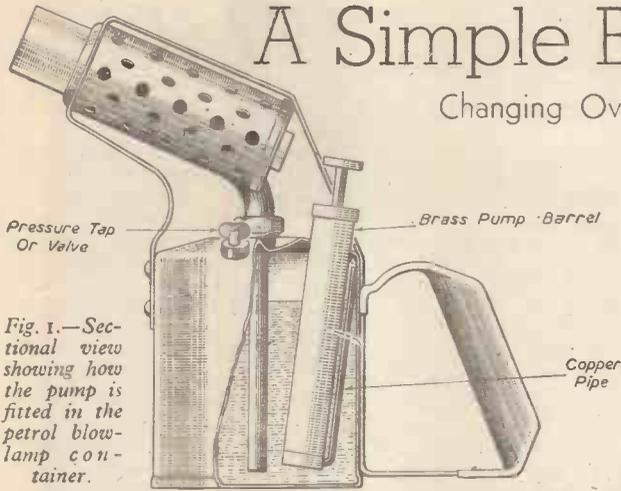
Sectional view showing how the pump is fitted in the petrol blowlamp container.
